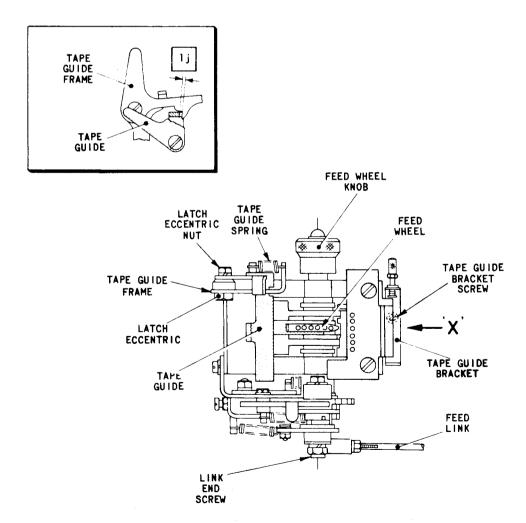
LATERAL TAPE GUIDE AND LATCH MECHANISM
